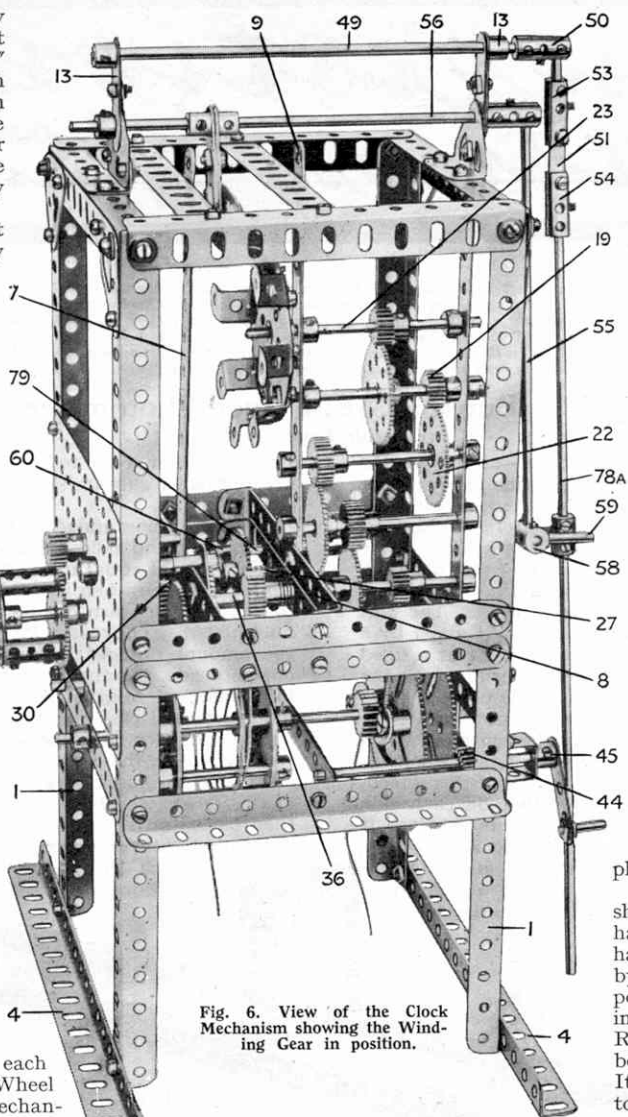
View of the Clock Mechanism showing the Winding Gear in position.
